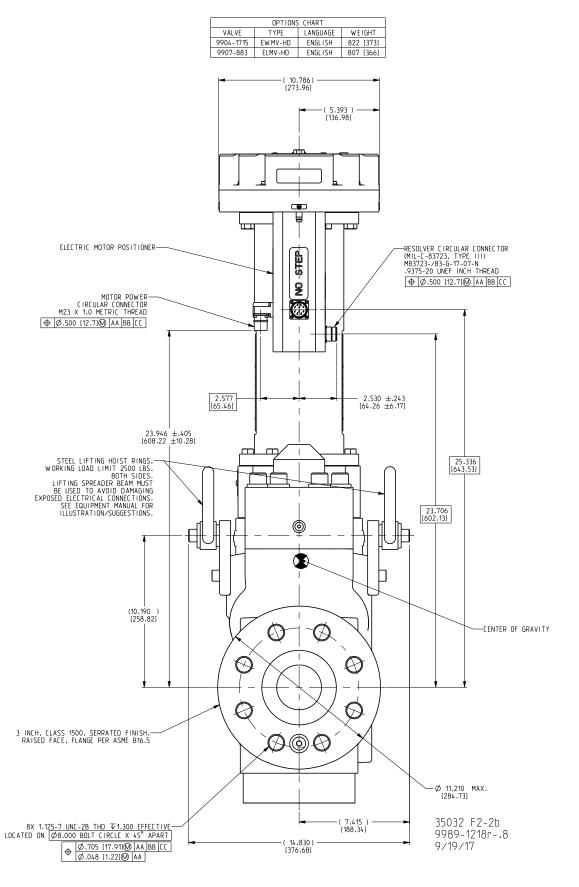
Outline Drawing of 3" ELMV-HD
